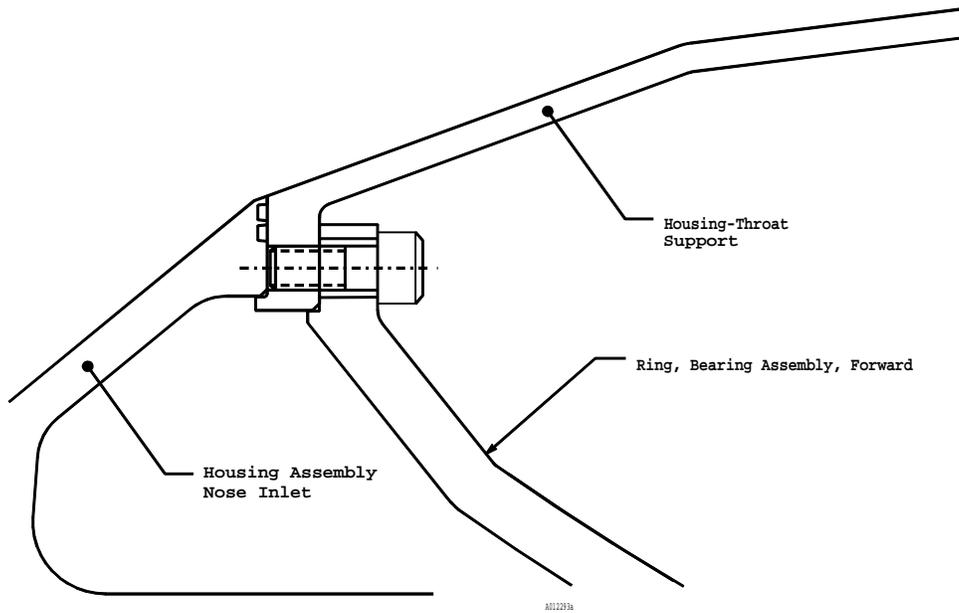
Nose Inlet-to-Throat-to-Forward End Ring Joint, Metal Components, Joint 3
